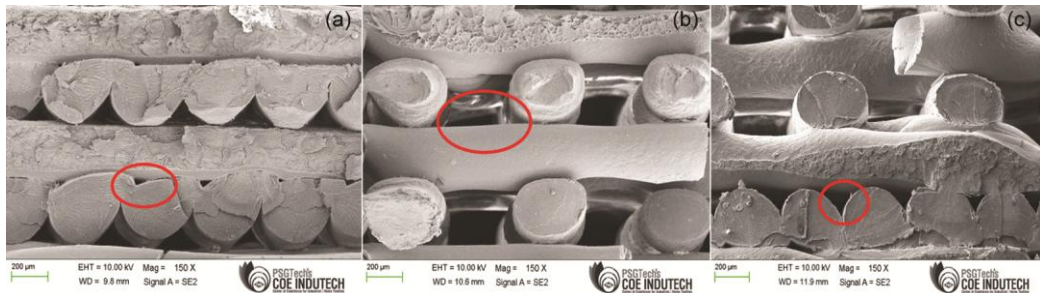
SEM images of the fracture surface of the specimens (a) honeycomb, (b) grid, and (c) rectilinear infill pattern.
